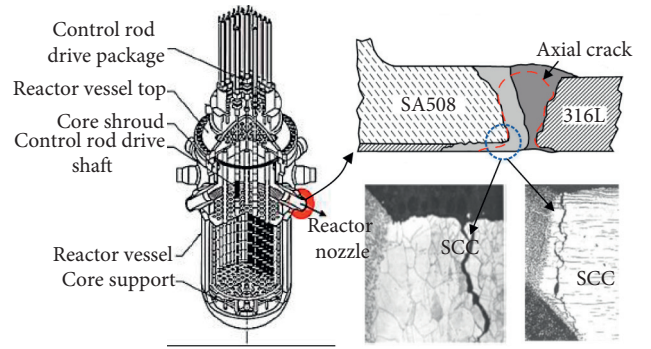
Schematic diagram of stress corrosion cracking of welded joint at the safety end of the primary circuit of PWRs [9, 10].
